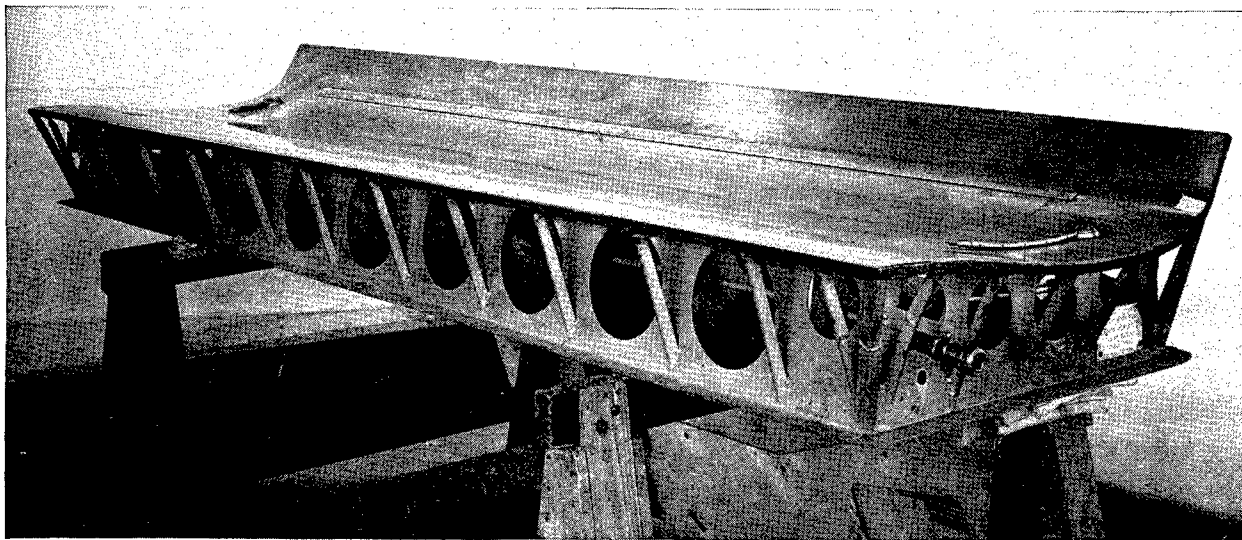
Typical mold of thin sheet metal supported by steel framework suitable for fluid-pressure molding of aircraft sandwich.
